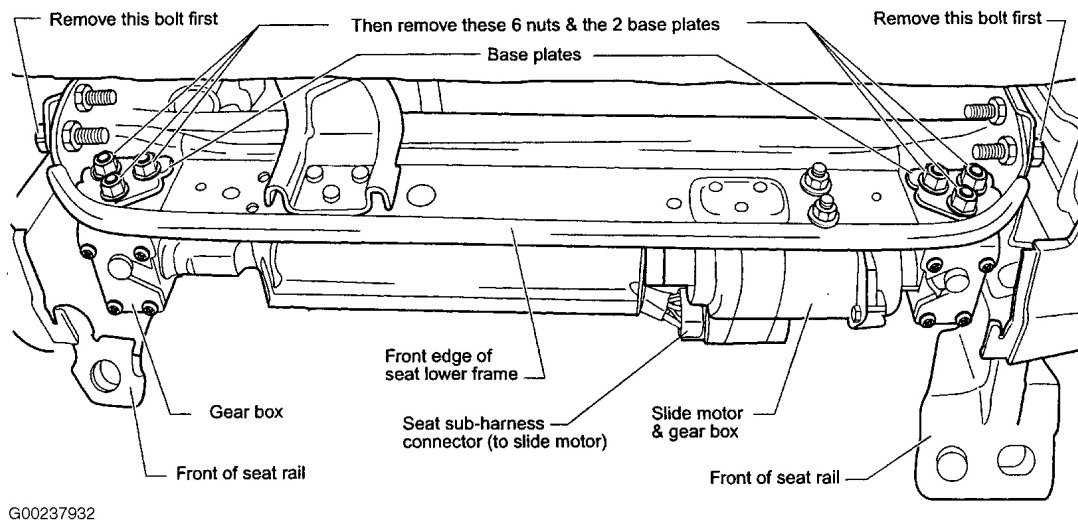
Disconnecting Connector & Releasing Gear Boxes
